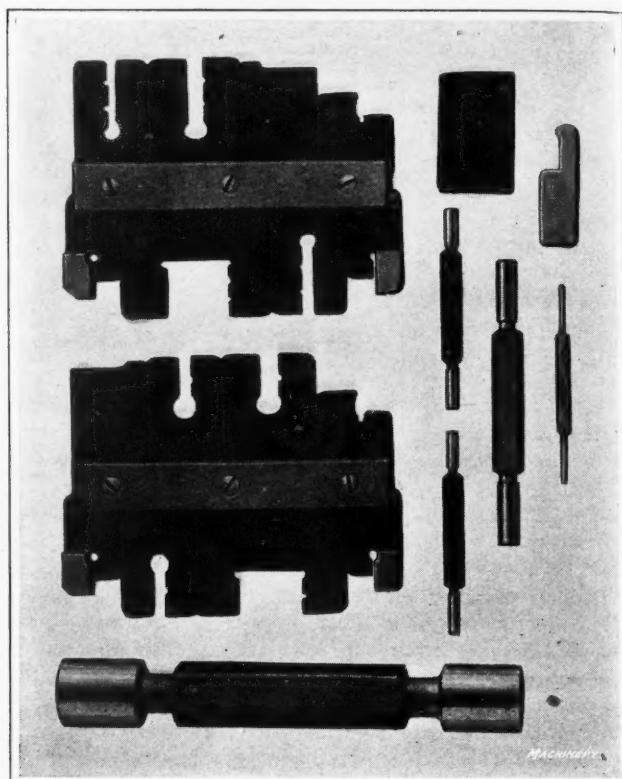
Complete Set of Working, Inspection, and Reference Gages showing how Different Types of Gages may be combined by the Built-up Gage Principle
